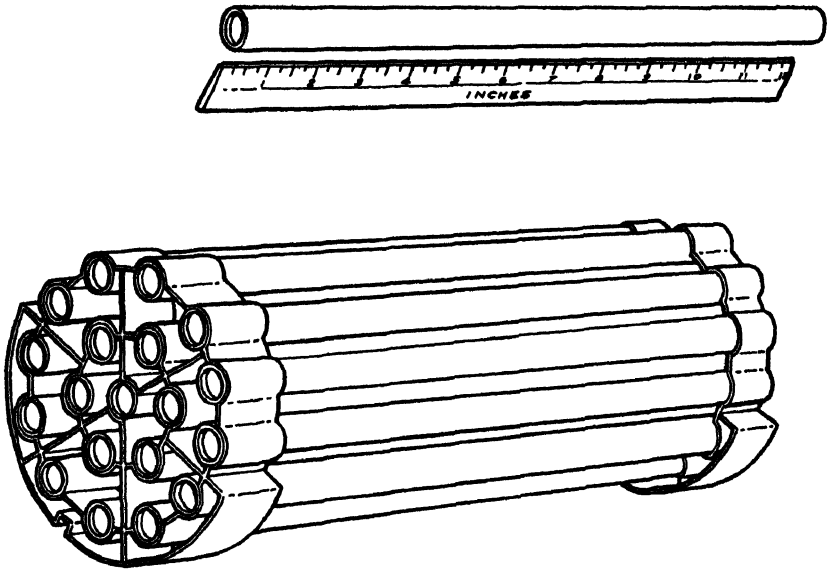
Fuel-element bundle steel-jacketed prototype (GNEC')
